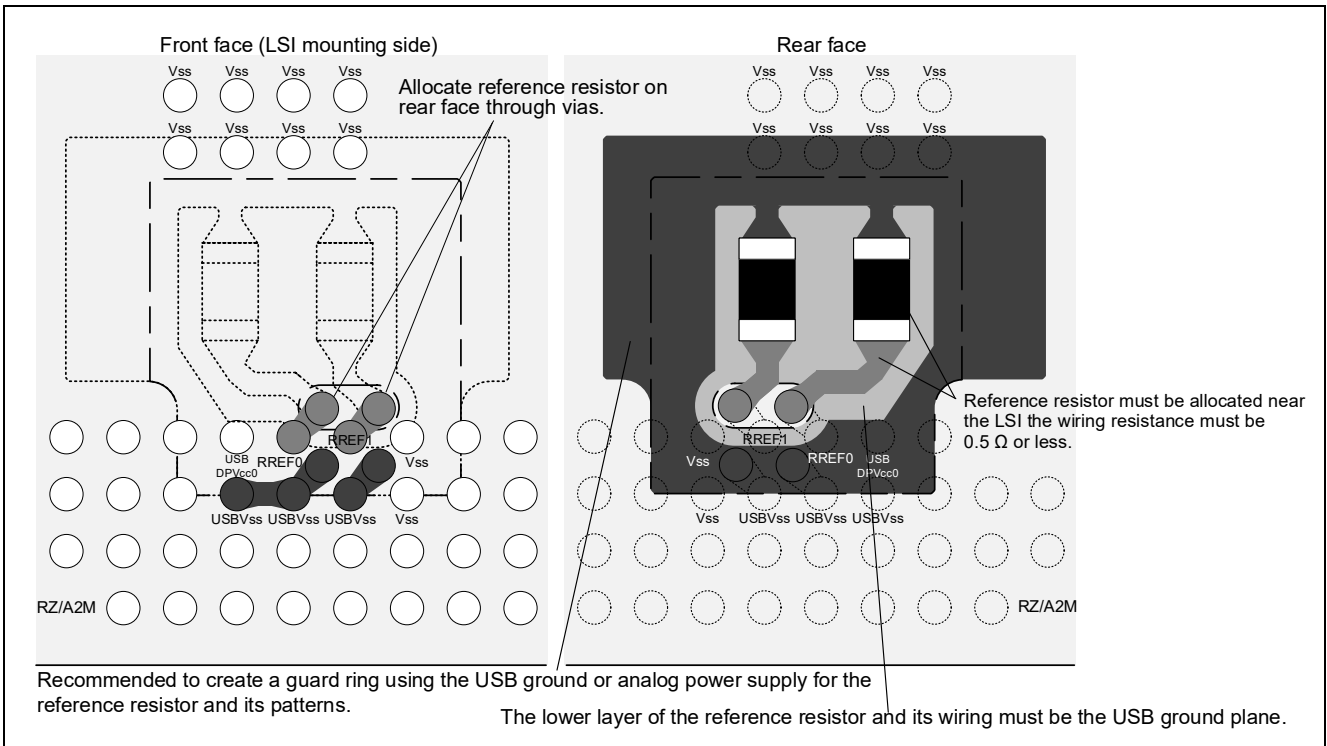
RREF pin vicinity pattern design example 3 (272 pin BGA package)
